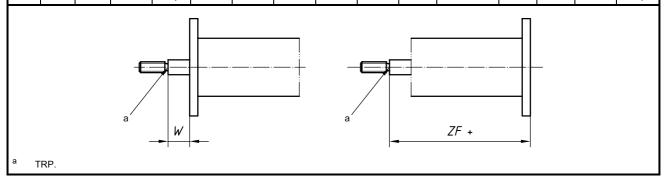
Head, rectangular flange (MF1) and cap, rectangular flange (MF2)
